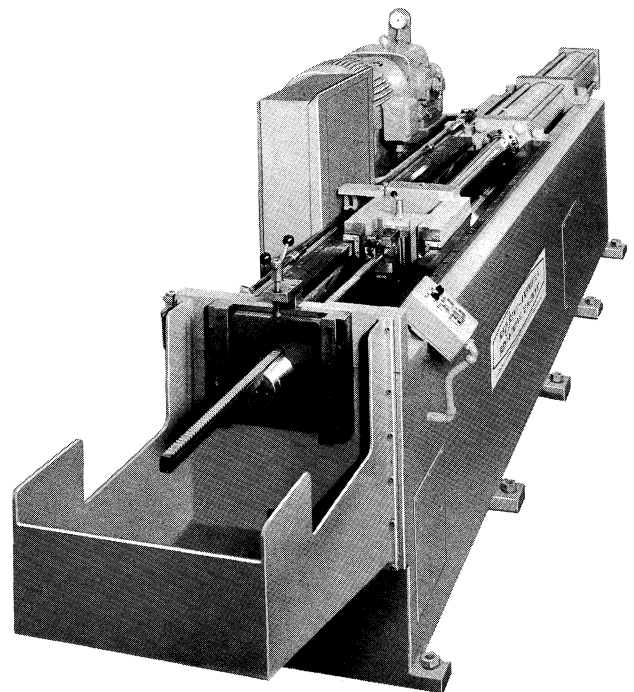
E Horizontal broaching machine with adjustable faceplate for multiple-pass keyway broaching.
